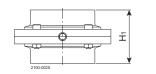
LKB with welding ends. Note! LKB sizes DN 125 and 150 are with six screws.
